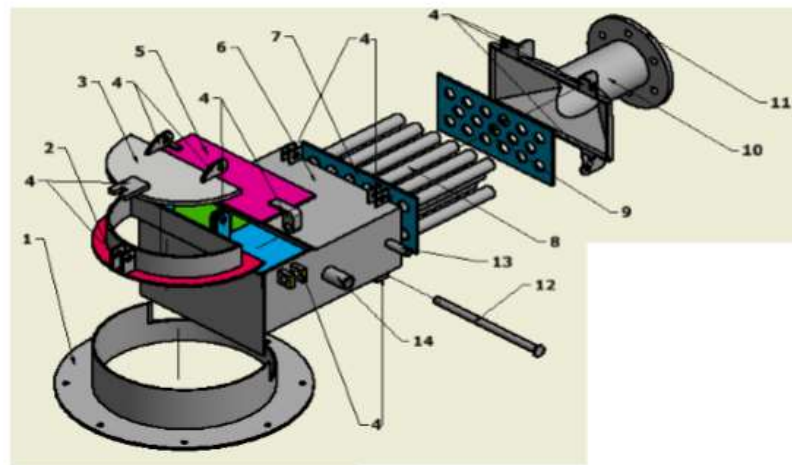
Economizer: (1) flank economizer, (2) tube window, (3) window, (4) switch, (5) window economizer, (6) casing economizer, (7) tube sheet economizer, (8) fire pipe, (9) tube sheet, (10) flue, (11) flue flank, (12) buffer screw, (13) socket input water, (14) socket output water
